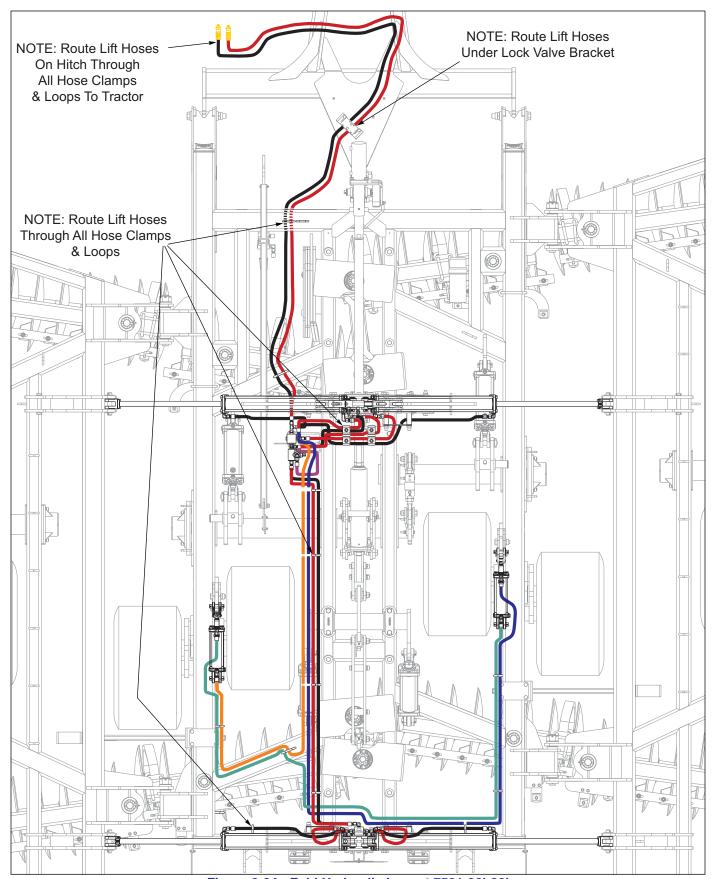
Fold Hydraulic Layout 7531-26'-29'
